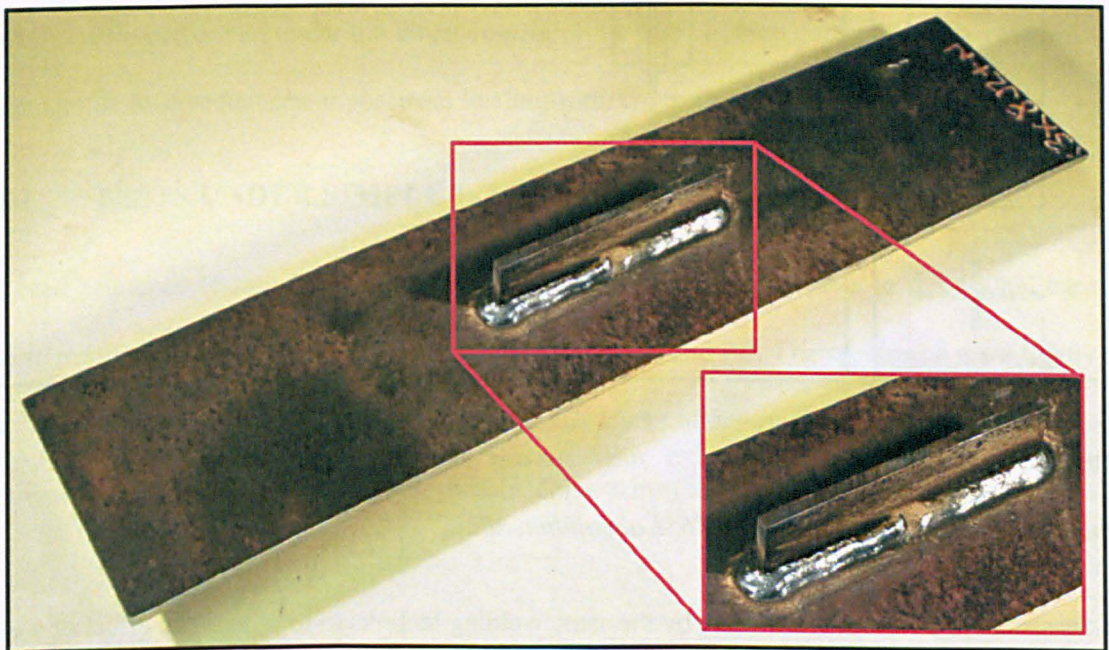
Steel fillet welded specimen showing weld detail.
